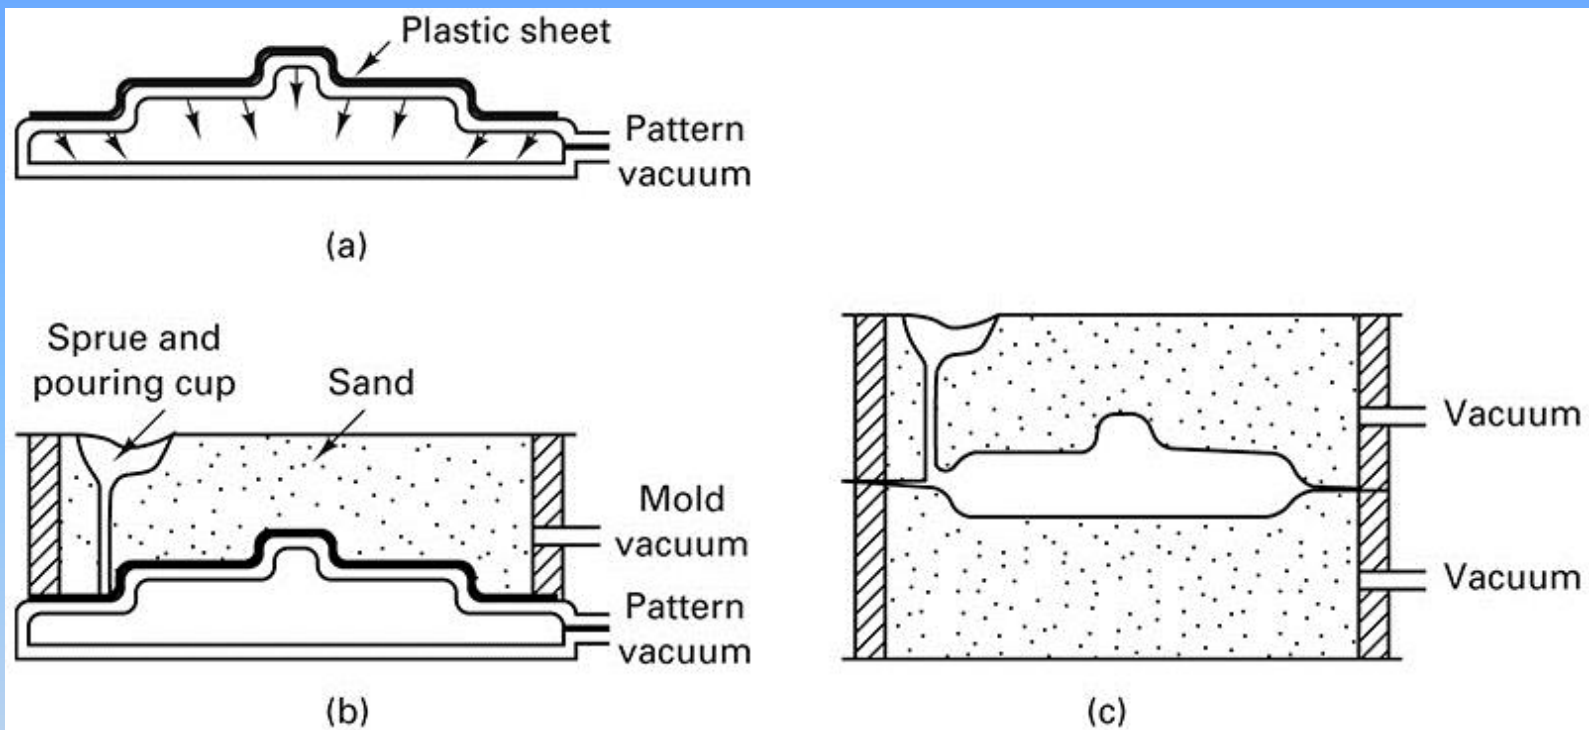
Schematic of the V-process or vacuum molding. A) A vacuum is pulled on a pattern, drawing a heated shrink-wrap plastic sheet tightly against it. b) A vacuum flask is placed over the pattern and filled with dry unbonded sand, a pouring basin and sprue are formed; the remaining sand is leveled; a second heated plastic sheet is placed on top; and a mold vacuum is drawn to compact the sand and hold the shape. c) With the mold vacuum being maintained, the pattern vacuum is then broken and the pattern is withdrawn. The cope and drag segments are assembled, and the molten metal is poured.
